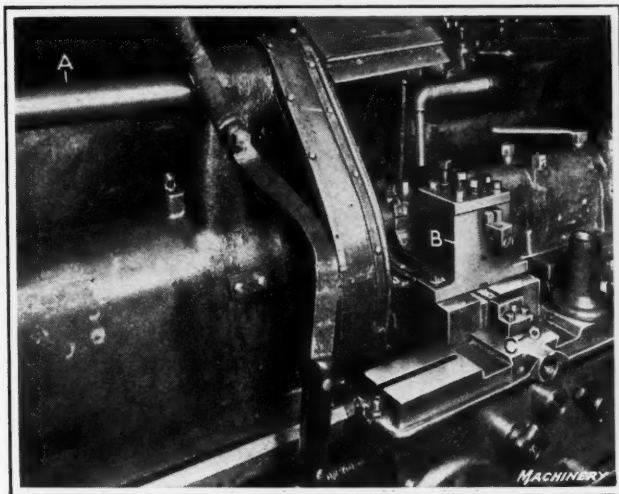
Lathe equipped with Special Direct Drive Heavily Constructed Head for Use in rough-forming the Surfaces which furnish the Seat for the Bowl Shell
